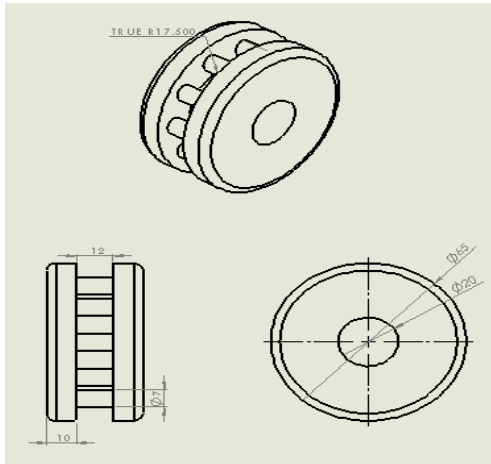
CAD drawing of roller pinion – FV, SV and Isometric.
